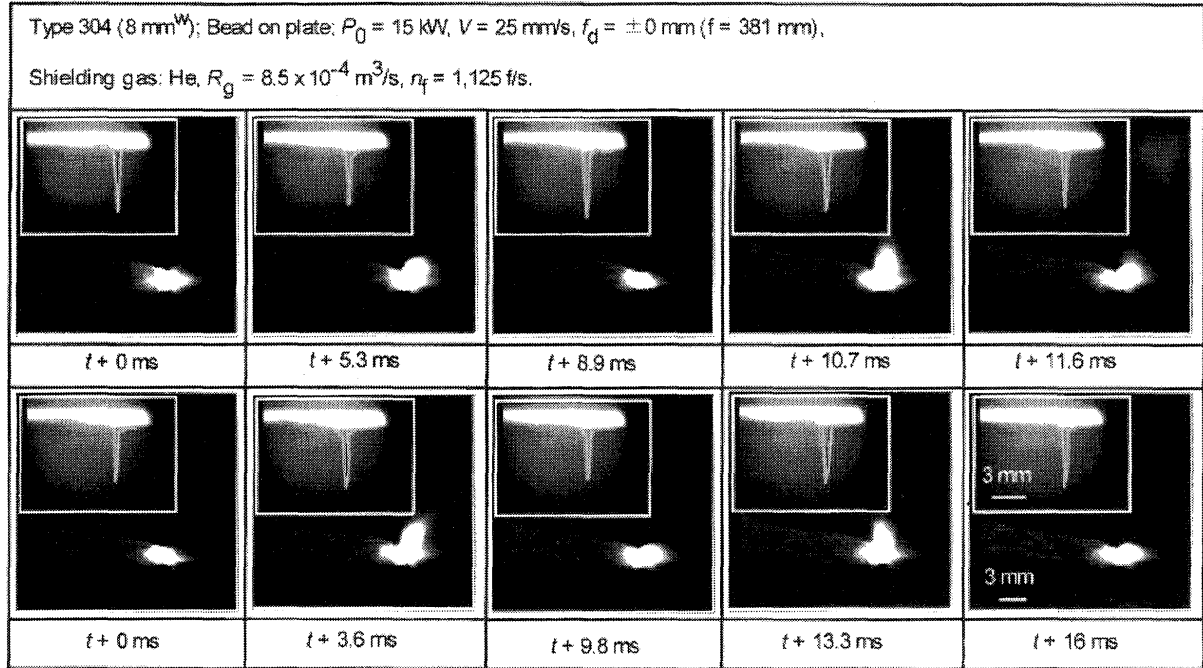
Dynamic behaviour of laser induced plasma and keyhole during CW CO<sub>2</sub> laser welding of stainless Steel in Helium shielding
